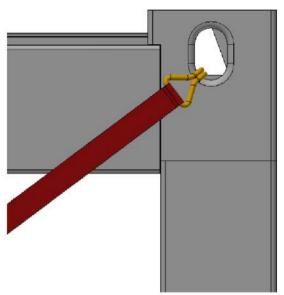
Method of attaching the conveyor belt to the corner of the container.
